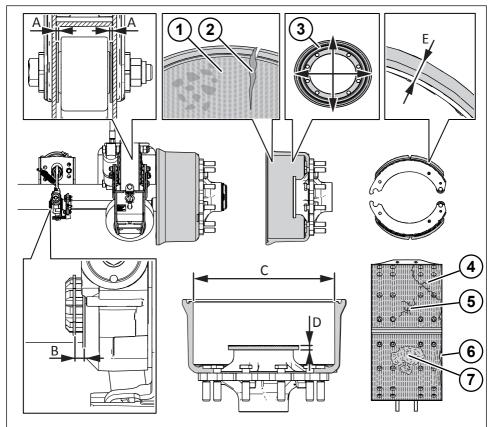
Wear dimensions: Air suspension, brakes and ASA
